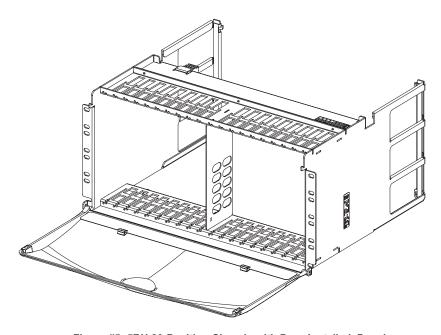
5RU 20-Position Chassis with Door Installed Drawing
